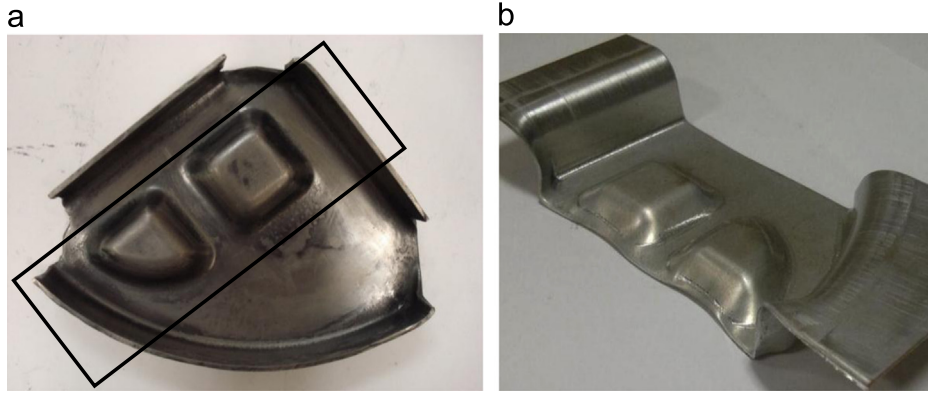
(a) Fully formed and trimmed part and (b) section formed, highlighted by rectangle in (a).
